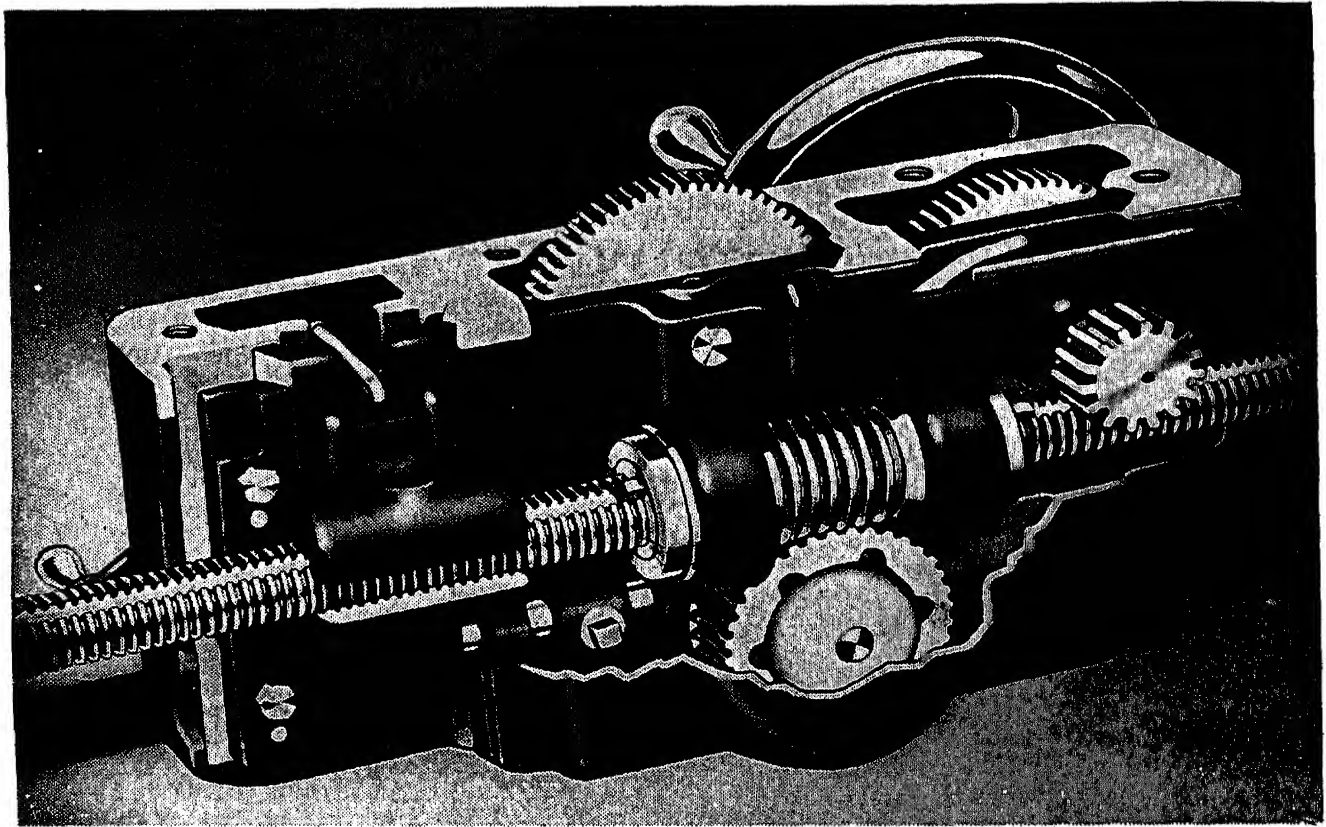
A cut away view of the back of a lathe apron. (Courtesy South Bend Lathe Works.)
